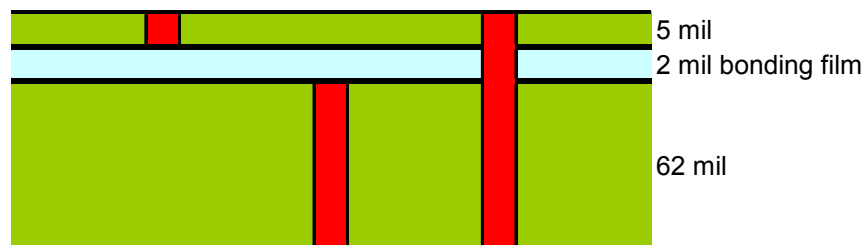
Cross-sectional view of the multilayer PCB built on FR4.
